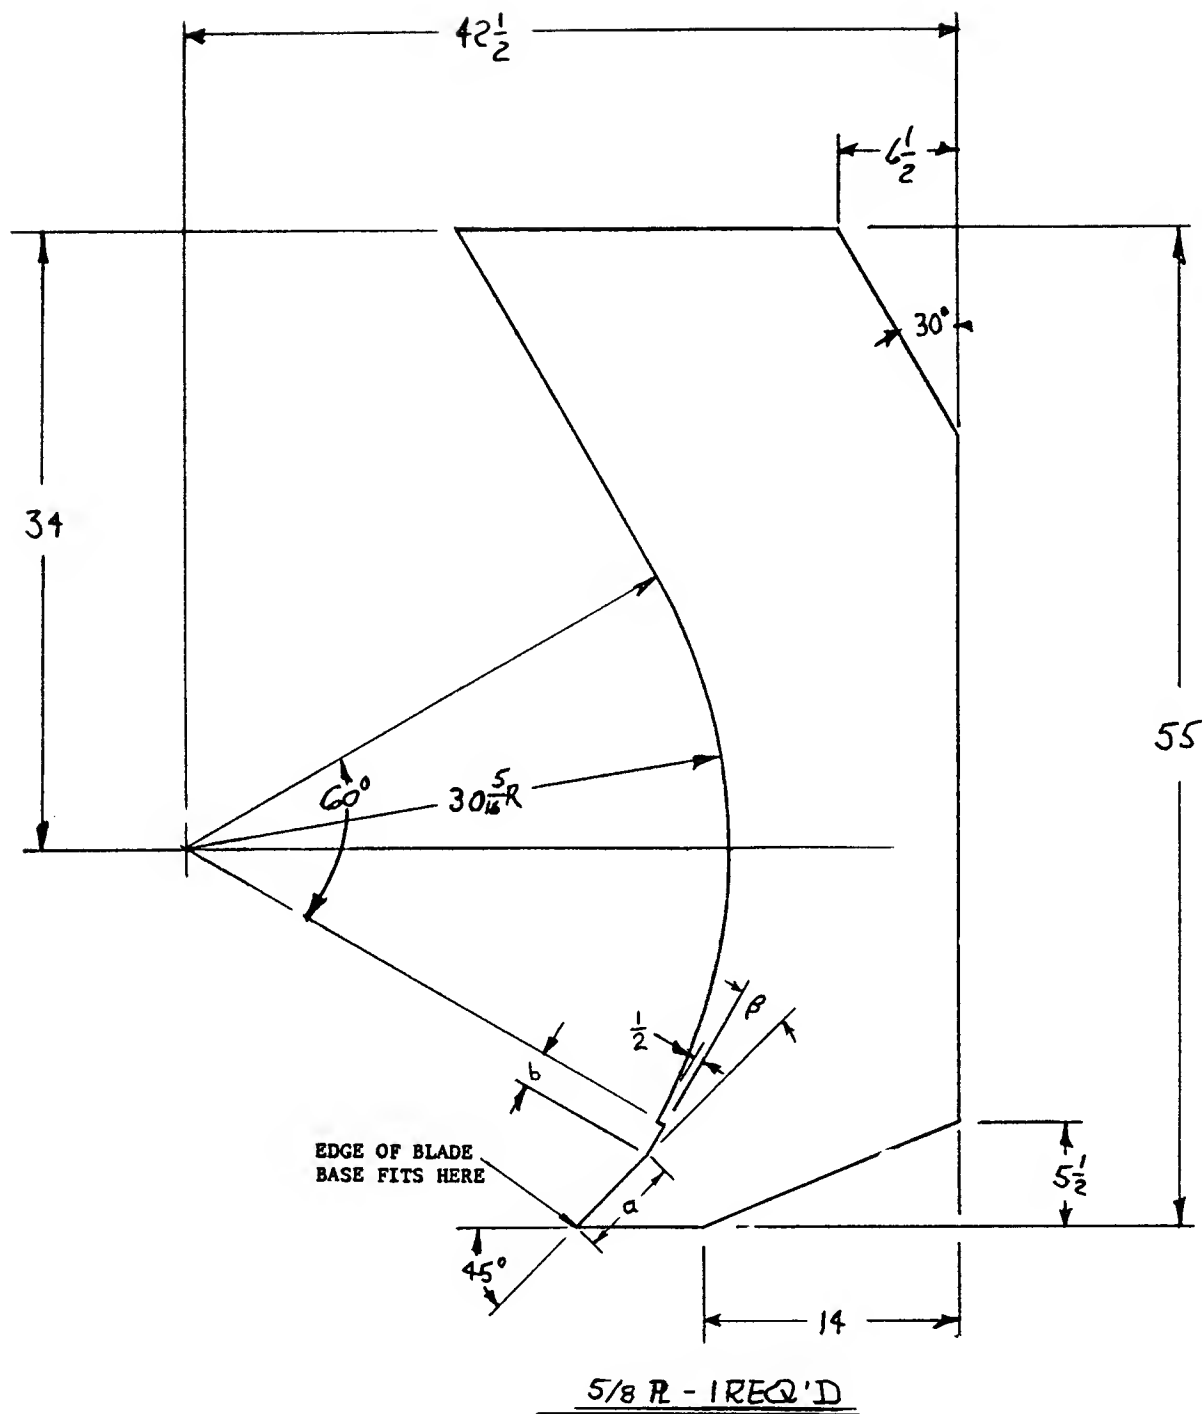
Roy Barnes' Drawing of the Side Sloper Flange Plate with Slight Modifications. Plate is Bolted to Dozer End Wing. View Perpendicular to Dozer Blade.
